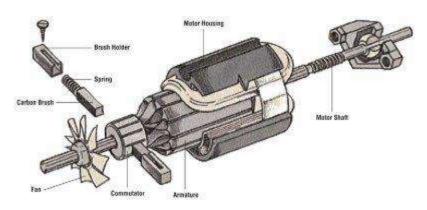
A universal motor has an armature and a rotating commutator, mounted on a motor shaft. Carbon brushes make the electrical contact; worn brushes are the most common problem.
